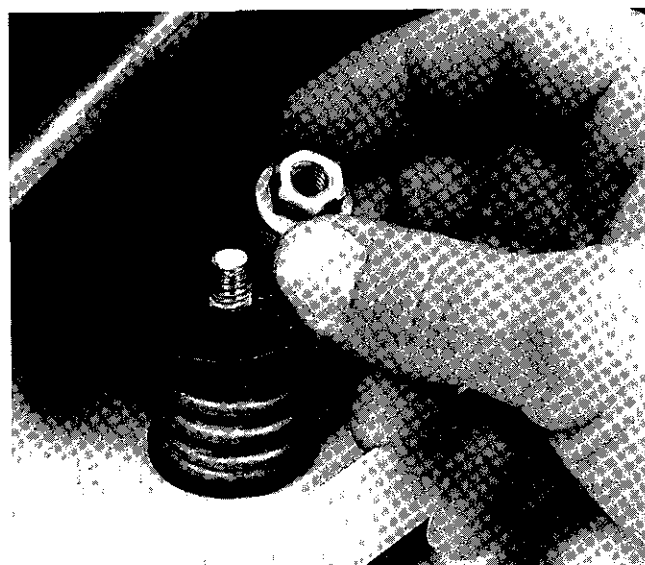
Removing Nut from Compressor Spring Mount (not all models)
